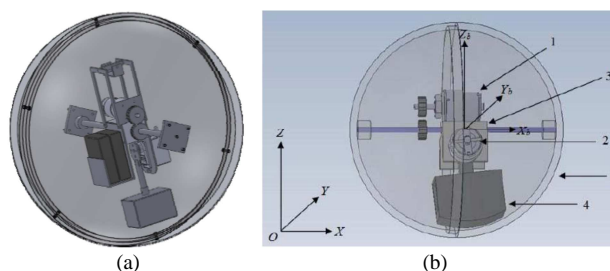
(a) 3D CAD view of the assembly (b) Different Body Parts: 1 – Driving motor, 2 – Steering motor, 3 - Internal Drive Unit (IDU), 4 - Counter weight pendulum, 5 - Shell
